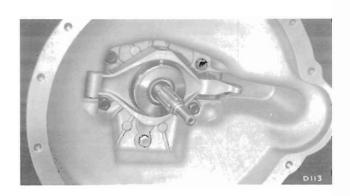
Clutch release bearing and operating lever (Herald 1200, 12/50 and Spitfire)
